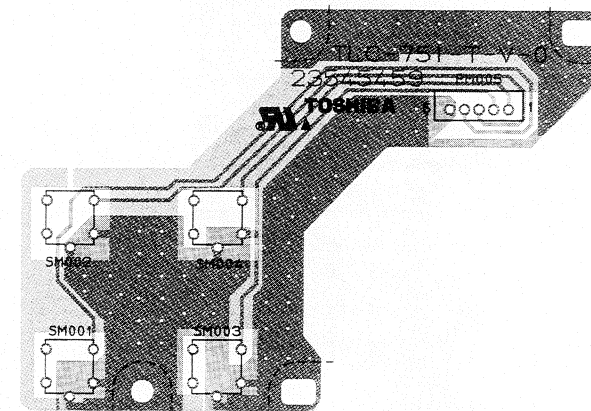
U0042 Switch PC Board (Bottom Side)
